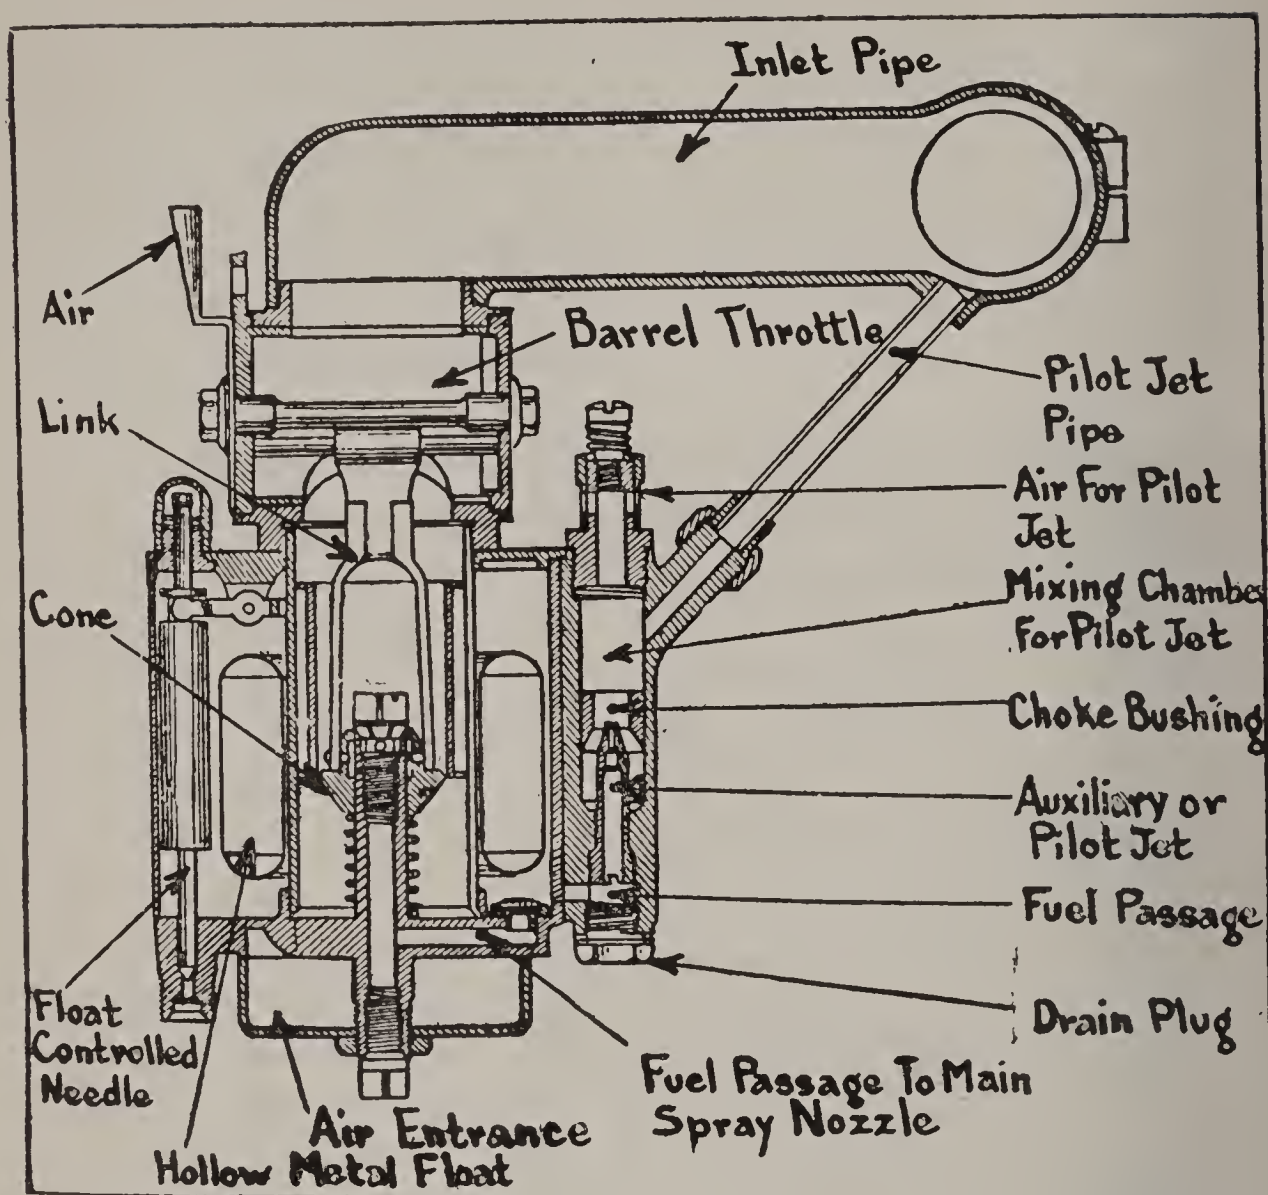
Sectional View Showing Interior Arrangement of Hedstrom Automatic Carburetor.
